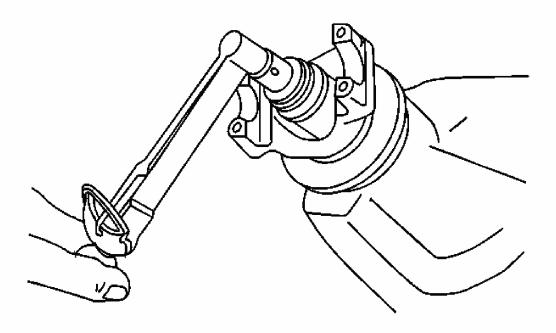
Measuring Pinion Rotating Torque Courtesy of GENERAL MOTORS CORP.
